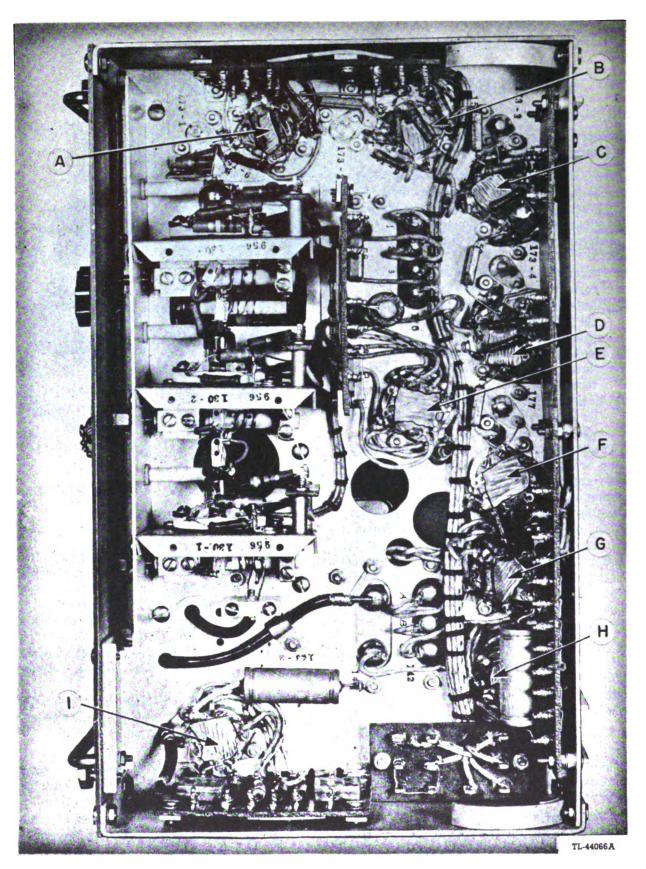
Transmitter-Receiver RT-48A/TPX-1, receiver chassis, bottom view, spray coat epplied and r-f section cover removed for brush-coating.
